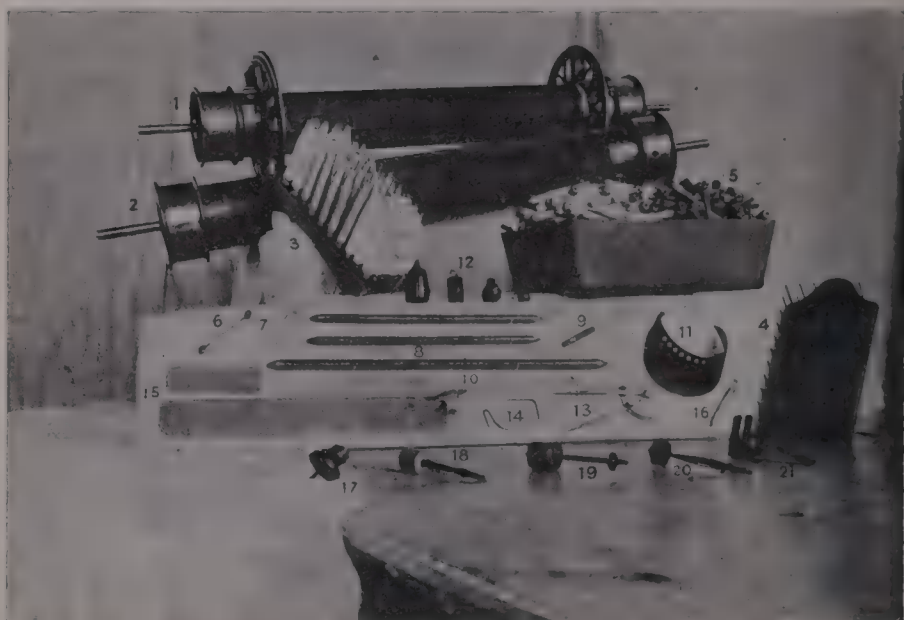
1. Flanged warp beam, with rod and apron. 2. Warp beam, with beam heads, rod and apron. 3. Quill board with wound quills. 4. Quill board, empty. 5. Fibre box and full quills. 6. Fibre swift brace. 7. Endless cotton-cord swift braces. 8. Three crossing rods. 9. Reeding hook. 10. Cross-reed holder hook. 11. Eye shade. 12. Winder swift tension weights. 13. Section spacing compass. 14. Section hook for sample warps. 15. Black, and white, strips for reed background. 16. Bone pick. 17. Doubler flyer guide. 18. Winder spindle, with wooden head. 19. Doubler spindle for take-up bobbin. 20. Quiller spindle with grooved head. 21. Iron bracket device for stopping bobbins from winding too full.
